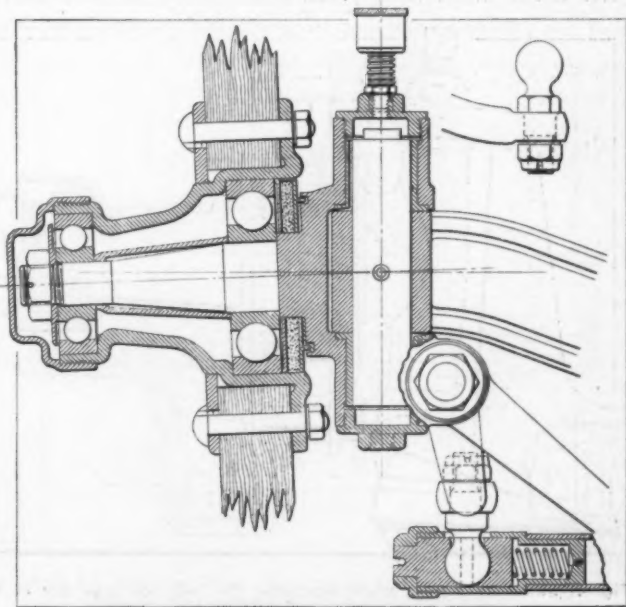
Example of a conventional steering wheel knuckle, with the road wheel center close to the pivot bolt.
